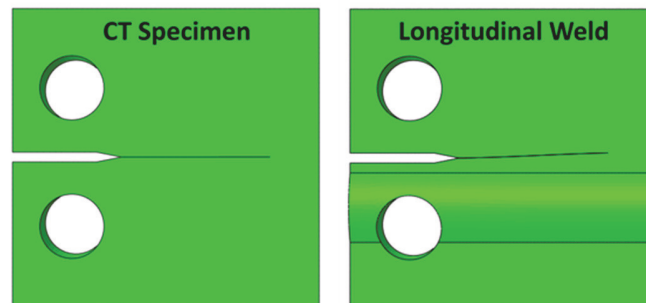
Crack propagation paths on both specimens, without and with a longitudinal weld.
